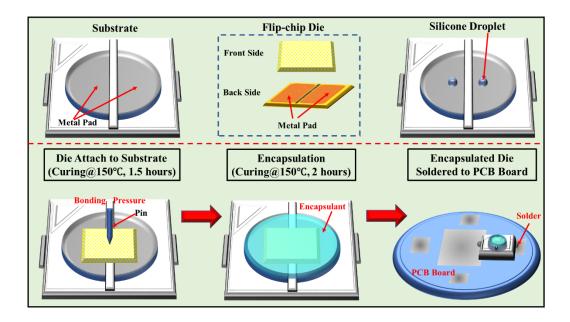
Fabrication of packaging process for flip-chip type high power LED.
